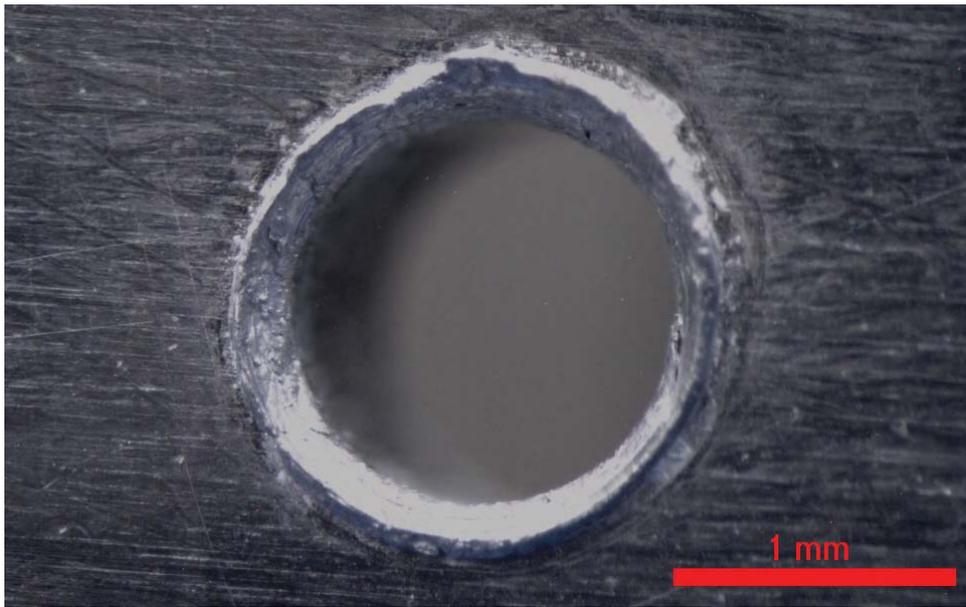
Problem at the hole entry caused by drill wandering on the workpiece surface when drilling began.
